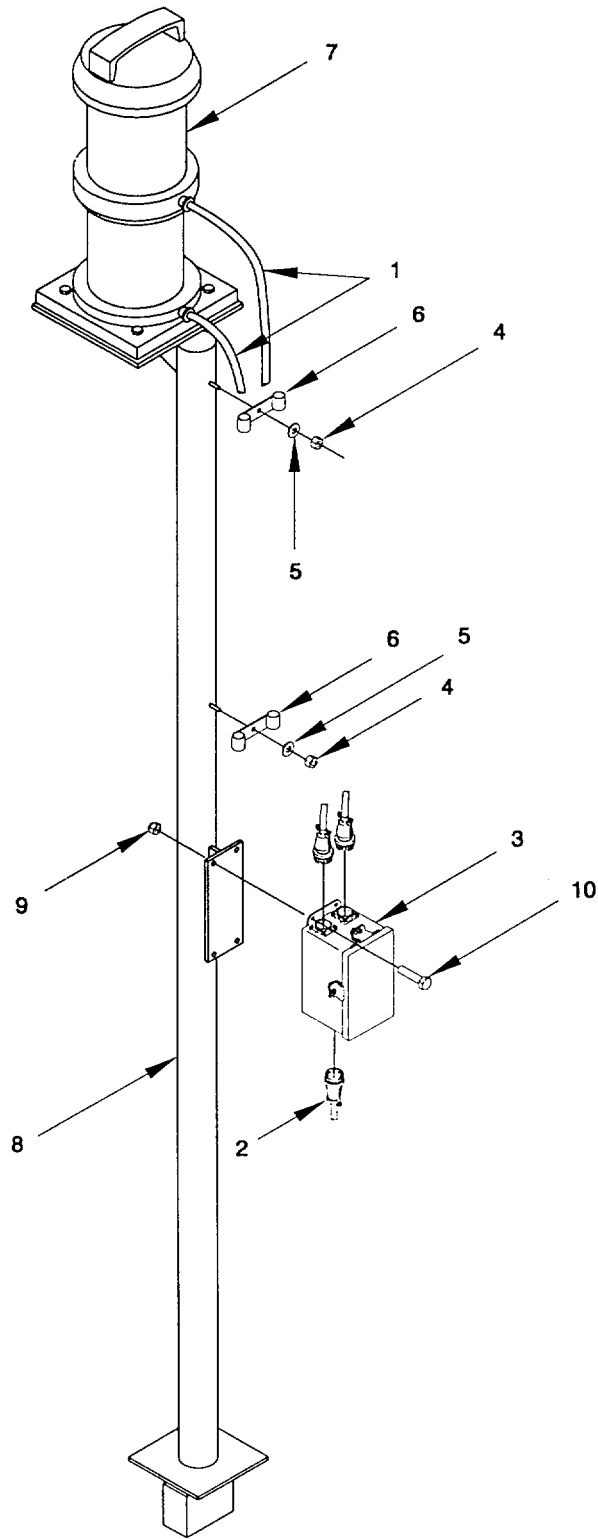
Cables and Enclosure Assembly, Remove/Install.
